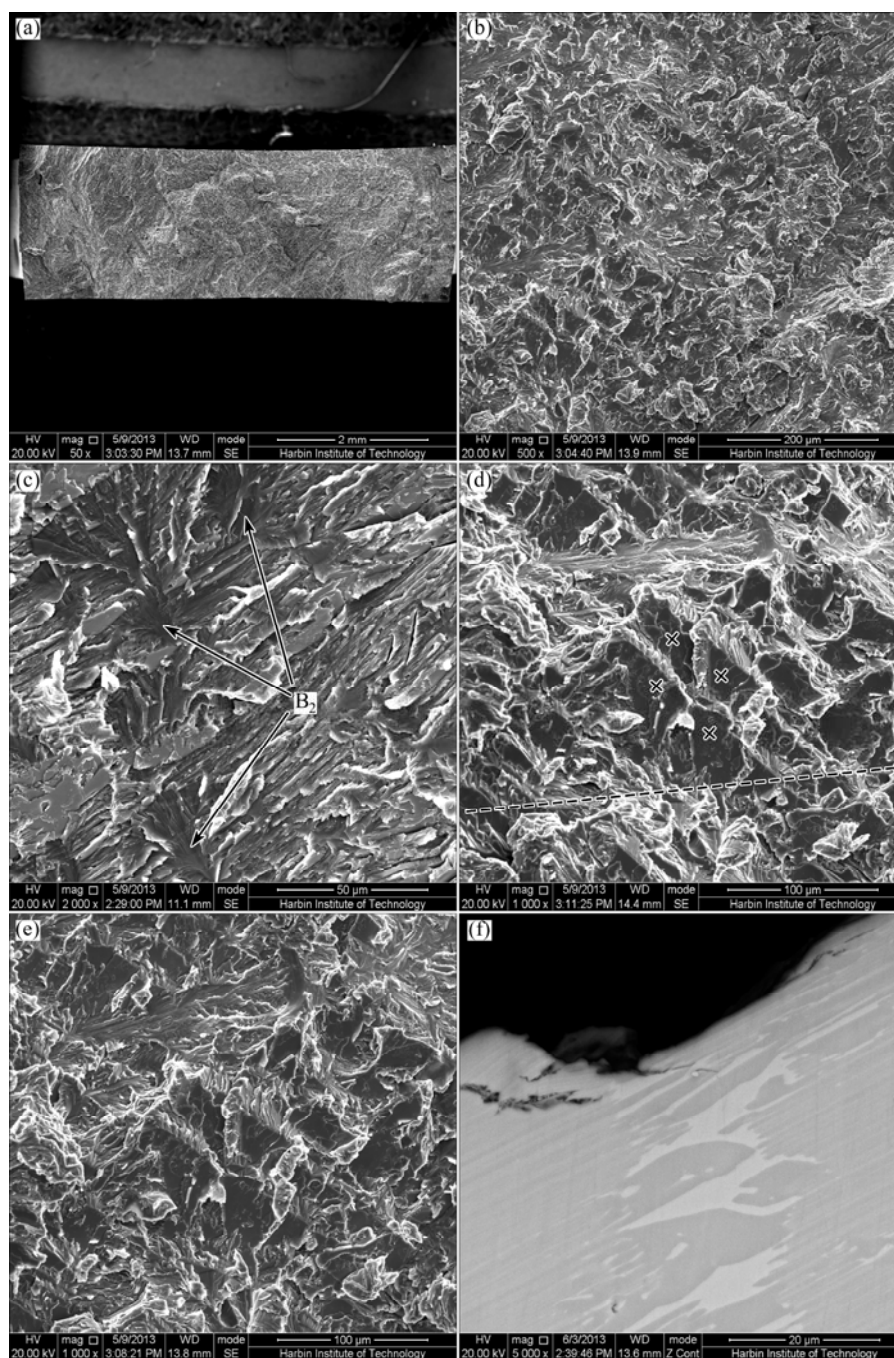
Fracture morphology and profile: (a) Whole image of fracture surface; (b) Fracture surface under lower magnification; (c) Brittle cleavage fracture of B_2 phase pointed by arrows; (d) Fracture surface under higher magnification with parallel facets marked by cross; (e) Mutually inclined for 30° with dotted line as rotation axis; (f) Fracture profile by SEM-BSE
